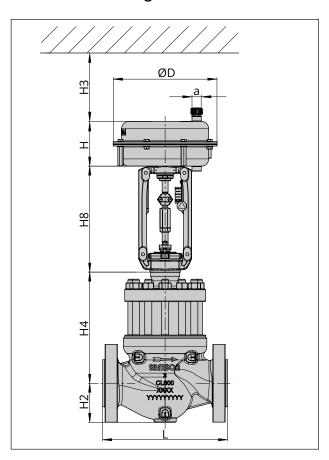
SMS HG-1 Control Valve: Type 261GR Valve with Type 3271 Pneumatic Actuator
